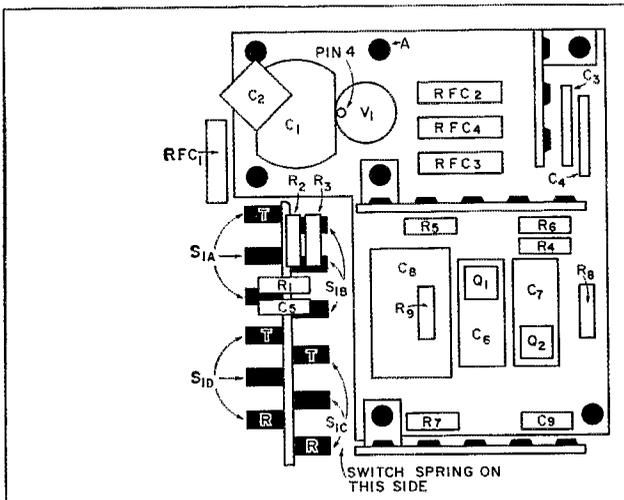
Location of components on the clear plastic sheet. One 3-terminal and two 5-terminal tie-point strips are required.
